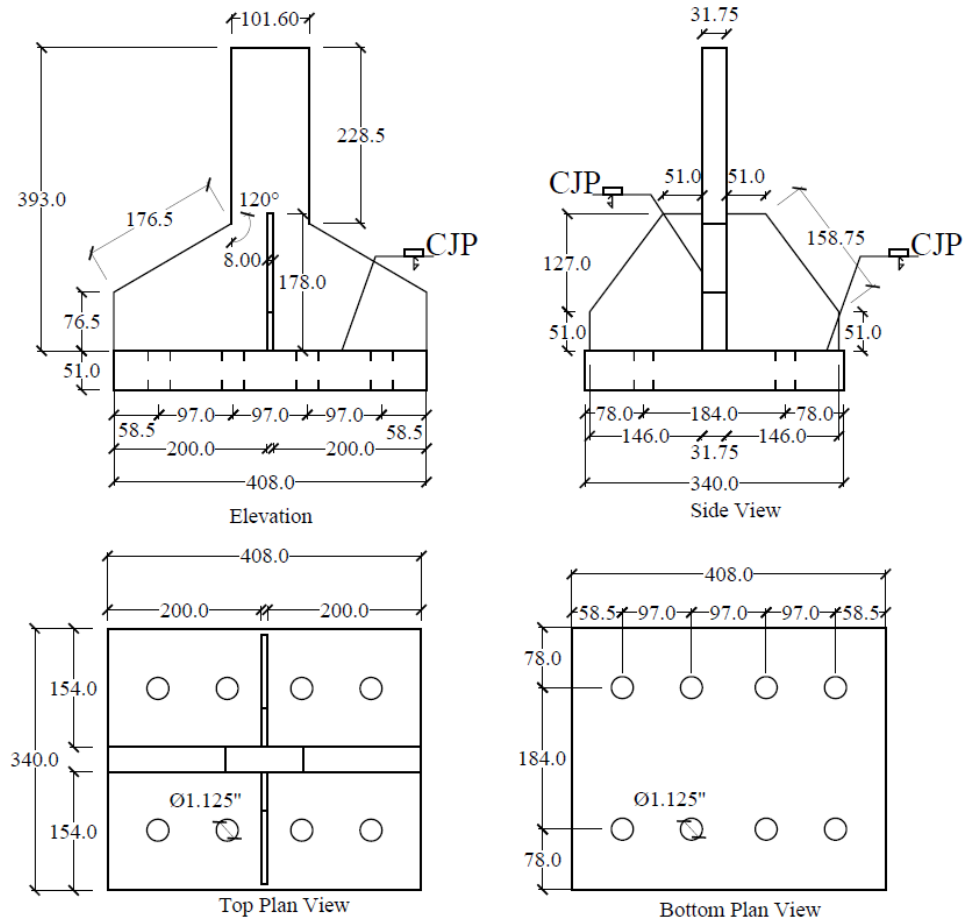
Detailed dimensions of the Steel Grip Assembly in millimeters.
